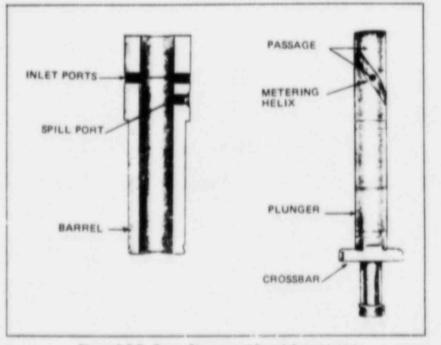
F-2. Pump Plunger and Barrel Arrangement
